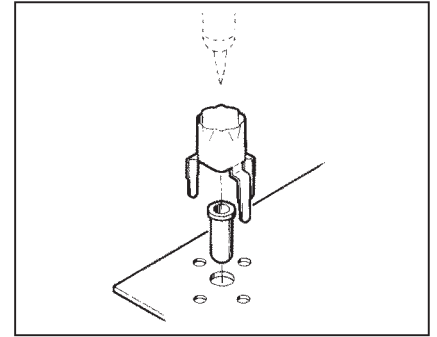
Typical ECB to Probe Tip Adaptor installation
